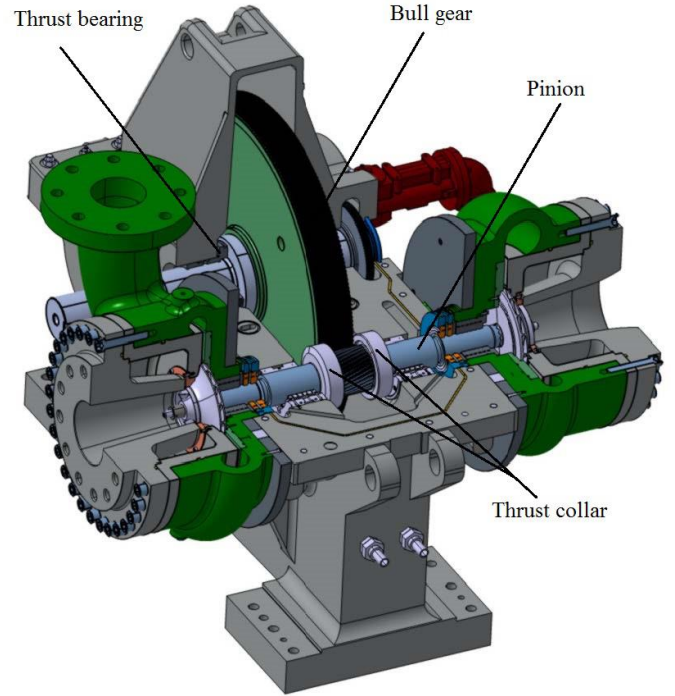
Assembly Showing Pinion, Bull Gear, Pinion, Thrust Collar, and Thrust Bearing on Bull Gear r.
